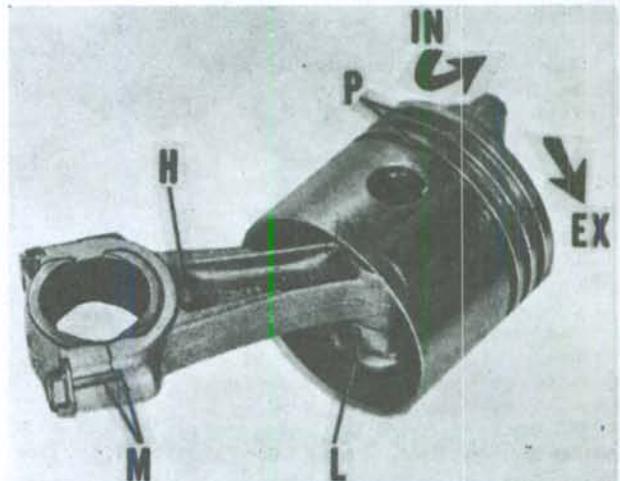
Piston must be correctly assembled to rod with long, sloping side of piston head toward exhaust (EX) and oil hole (H) in rod up. When installing rod cap, make certain that marks (M) on rod and cap are aligned.
